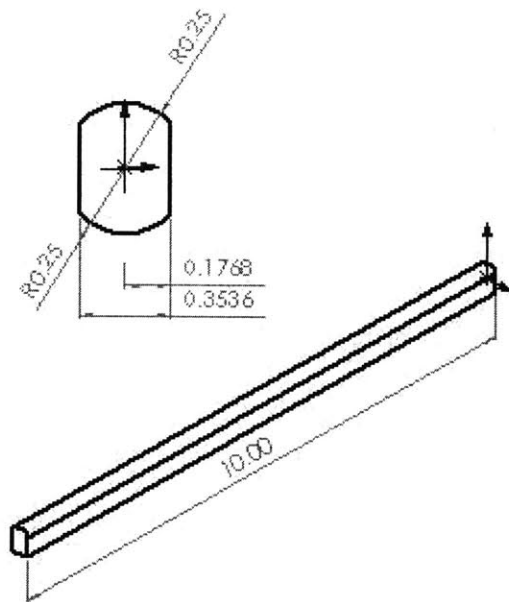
Dimensions of the centilever beam used in the magnet-across-coils system.
